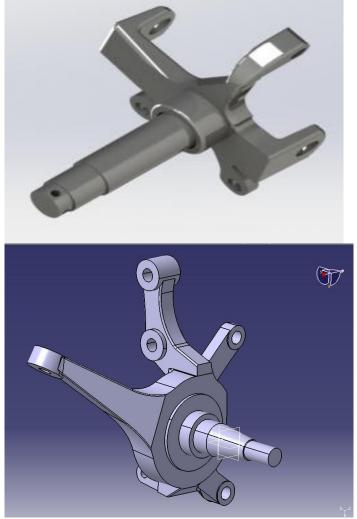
CAD model of Steering Knuckle with integrated Spindle
